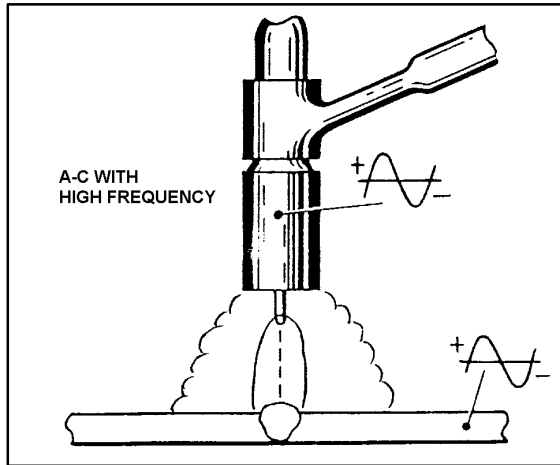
Set TIG to AC current for welding aluminum and magnesium.
